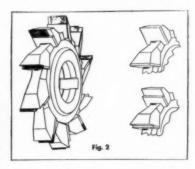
Reclaiming a double face mill. Teeth of the high speed cutter are ground down, and carbide tips are brazed to the faces. Note that tips are staggered so that every tooth cuts on one side, and intermediate teeth on the other. Detail views show the cutter teeth before grinding and after grinding, before brazing the tip in place. After brazing, the tips are ground to original cutter specifications, taking care that rake and clearance angles follow recommended Carboloy carbide tool practice.
